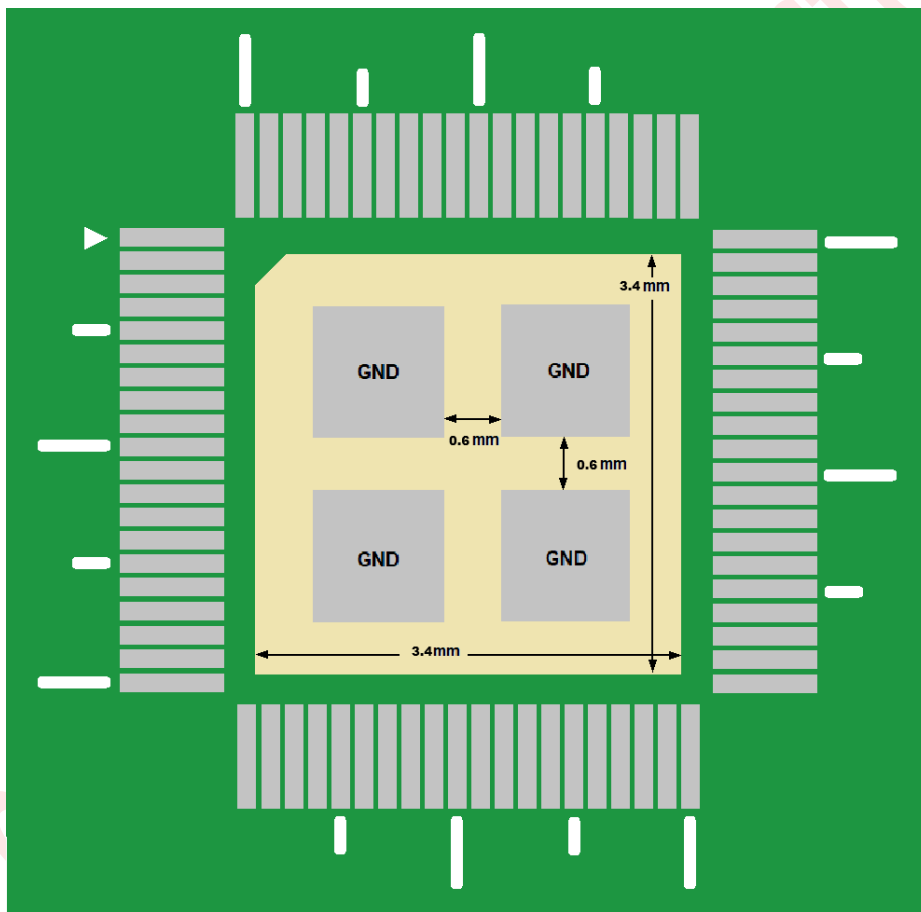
PCB Design Recommendation for the LT165A Bottom Ground Pad
